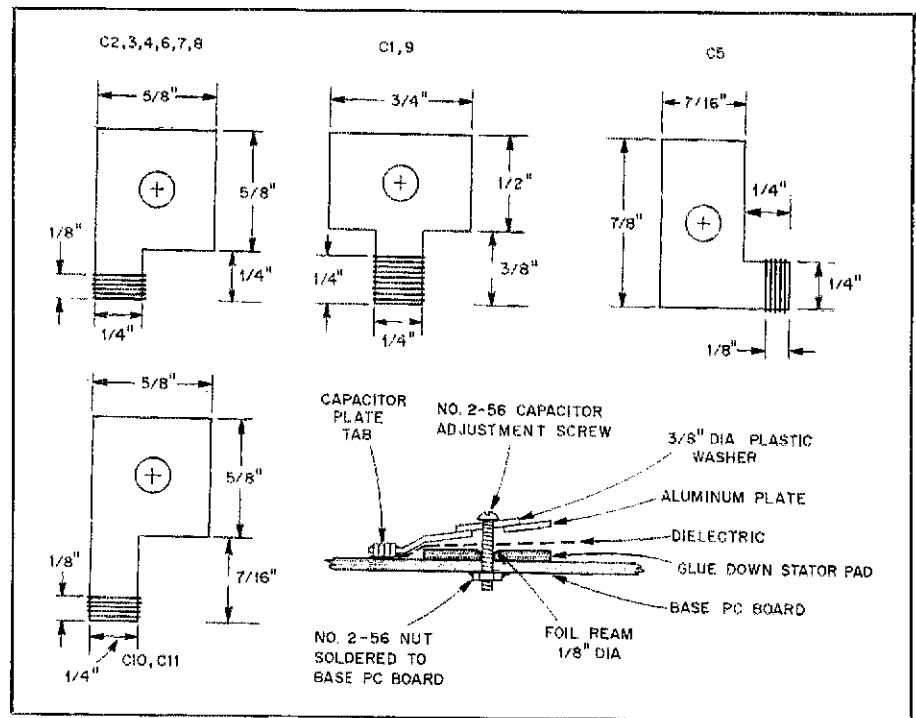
Variable-capacitor construction details. The "rotor" plates are made from 0.031-inch Reynolds aluminum sheet stock and polished with 320-grit sandpaper to ensure that no burrs are left that may puncture the dielectric material. Plate center holes are 3/16-inch diameter. Connections are made to the capacitors by means of no. 26 tinned copper wire, tightly wrapped (and crimped in a vise) around the tab on the capacitor and soldered to the appropriate circuit board connection. Make these connections carefully to ensure good electrical contact. See text for details on the dielectric and washer materials.
